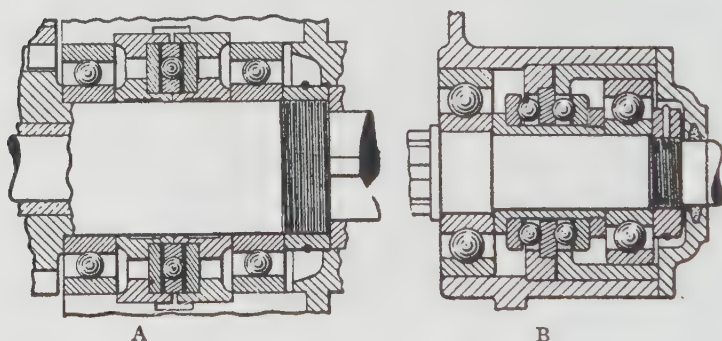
MOUNTINGS FOR PRIMARY SHAFT BEARINGS.
